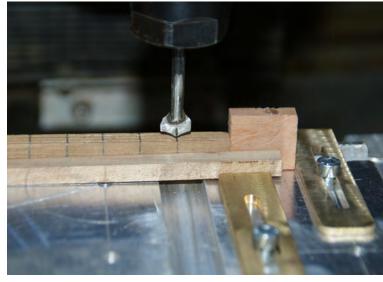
Step two: using my tool n°. 1. I use it as a milling tool to shape the upper part of the shell.
